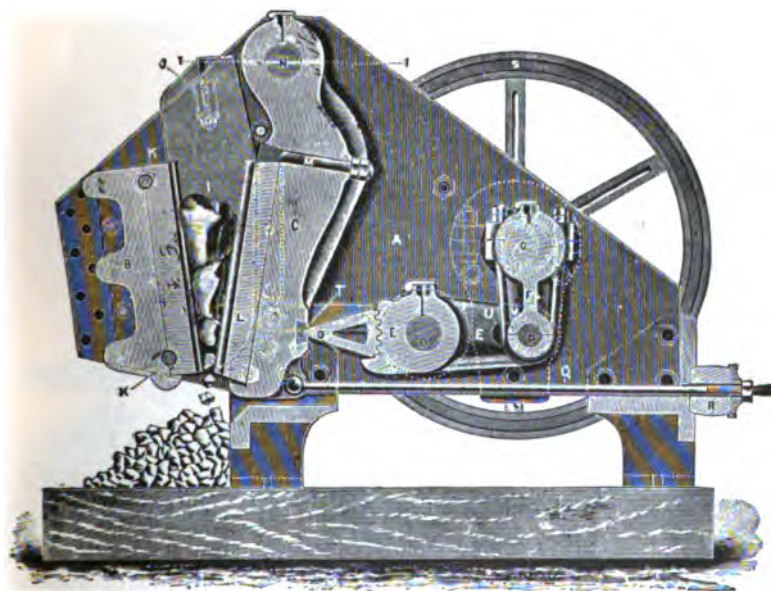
THE WESTERN CRUSHER. SECTIONAL VIEW.
